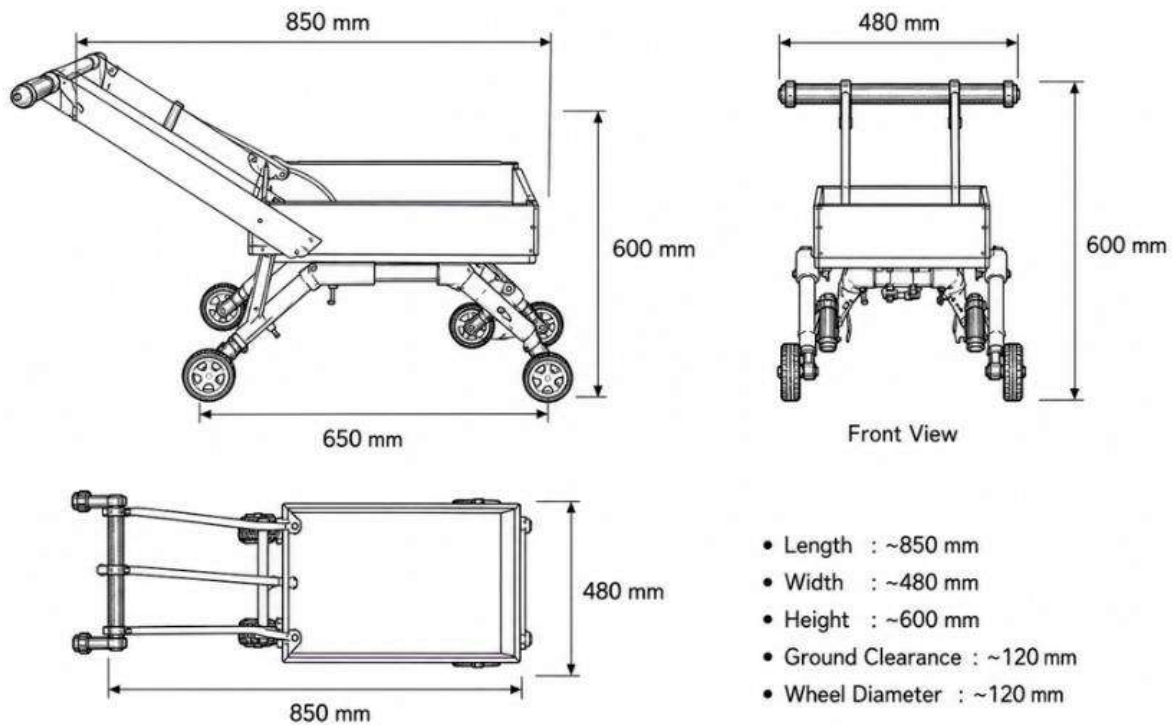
Dimensional drawing and overall structure of the six-wheel rocker–bogie robot
